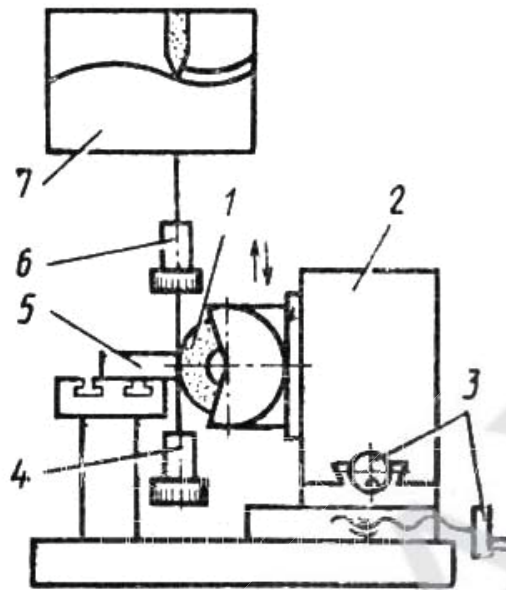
Scheme of forming the profile guide on an optical profile grinding machine
